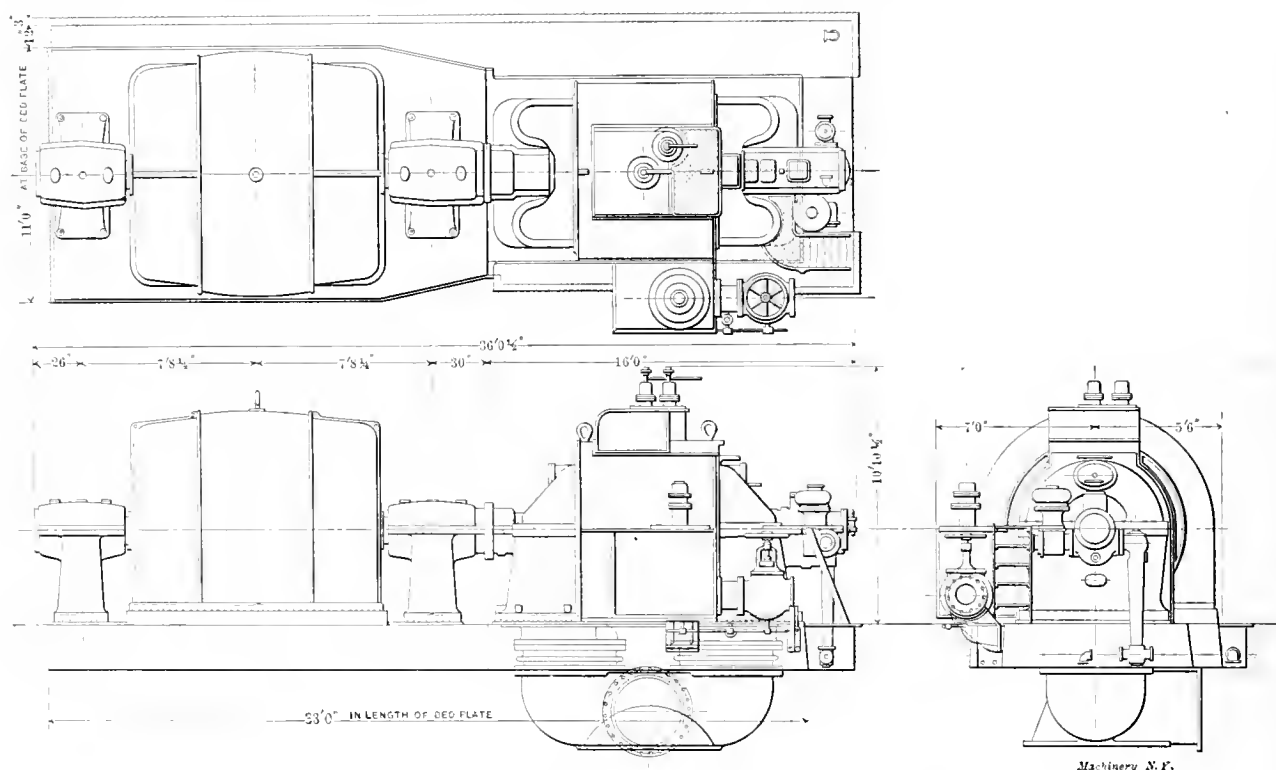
Plan and Elevation of the Westinghouse 5000 K.W. Double-flow Steam Turbine.
